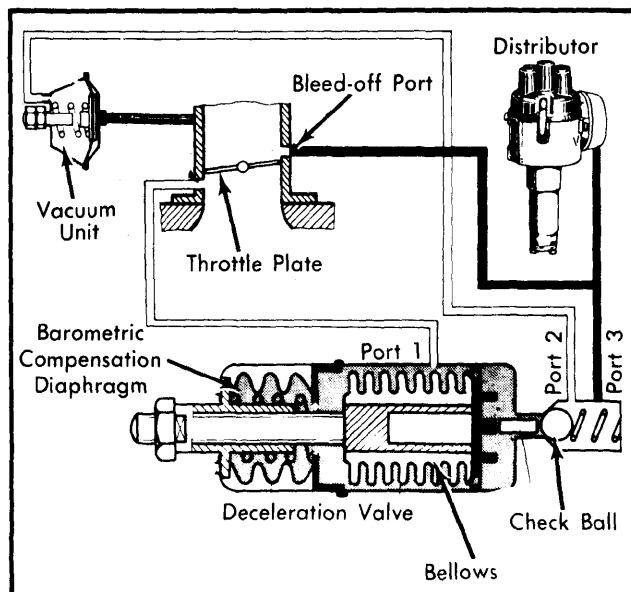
Deceleration Control System At Idle (604 Shown, 505 Similar)
